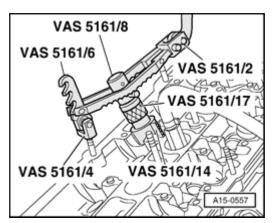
Screwing Snap-In Device VAS5161/6 With Attaching Fork VAS5161/4 Onto Stud On Cylinder Head
